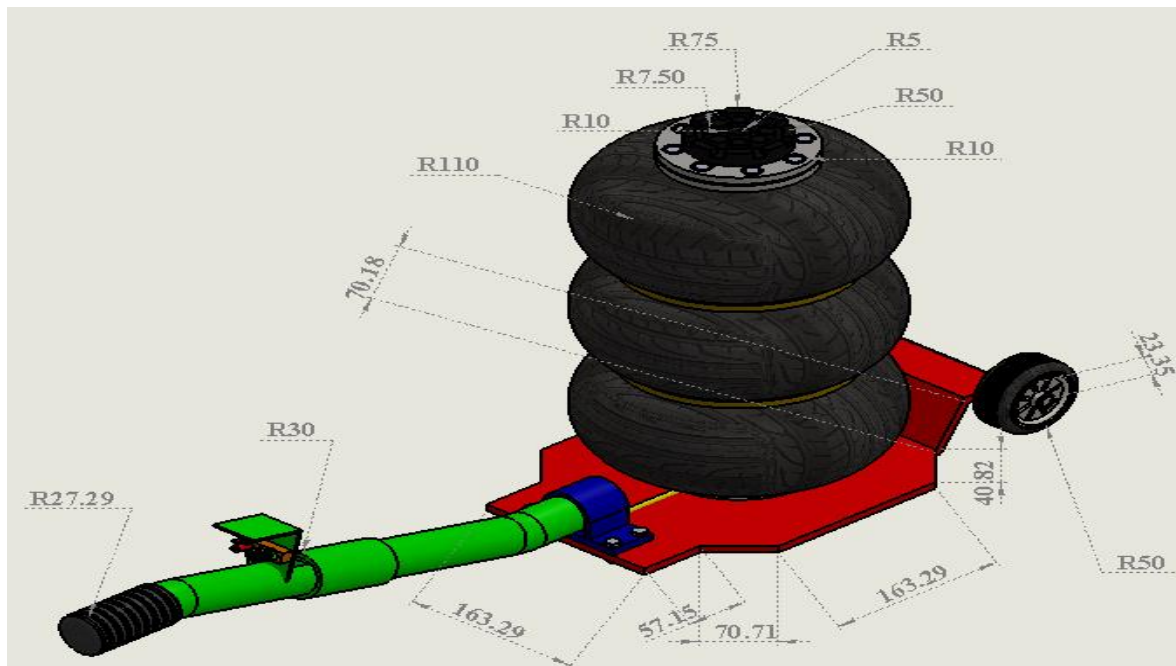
Assembly of extended handle pneumatic jack and its dimensions
